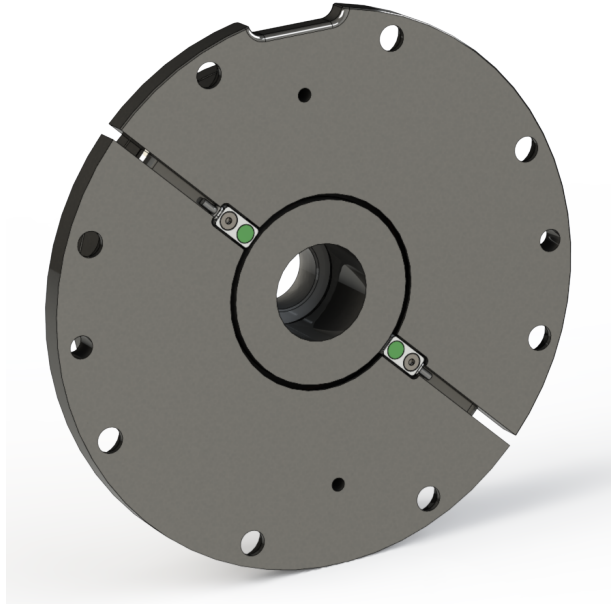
Location of the axial position sensors on the magnetic thrust bearing.
